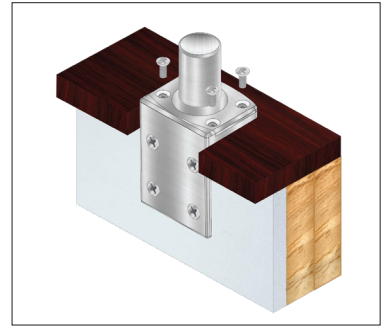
Figure N. (Right) Attach Rail Mounting Base with four (4) 5/16" x 1/2" machine screws.
